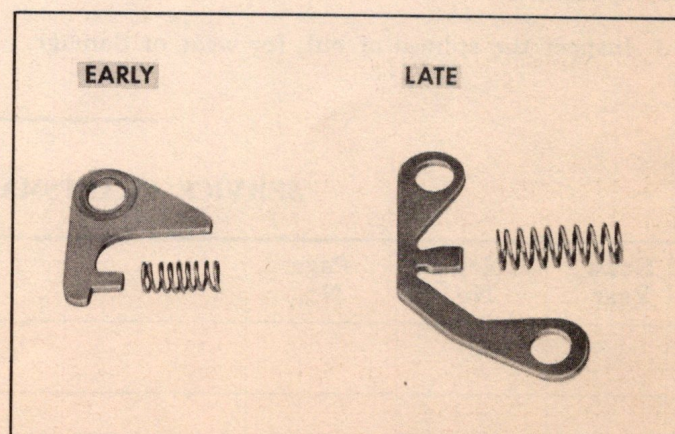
Parking Blocker Piston Spring and Stop (Early and Late)
